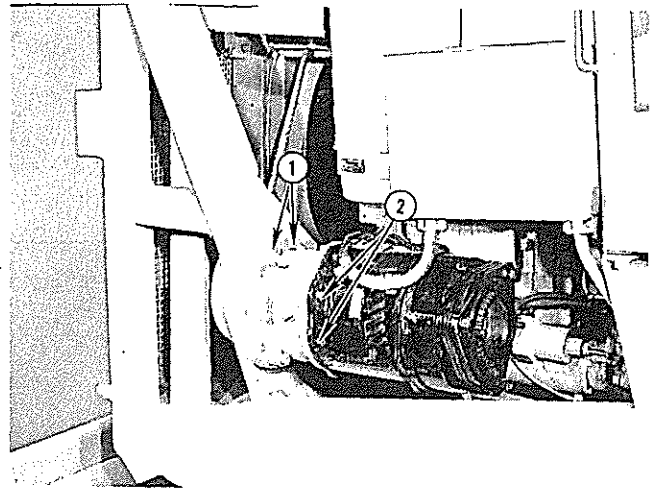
DOZER MOTOR AND GEAR BOX
